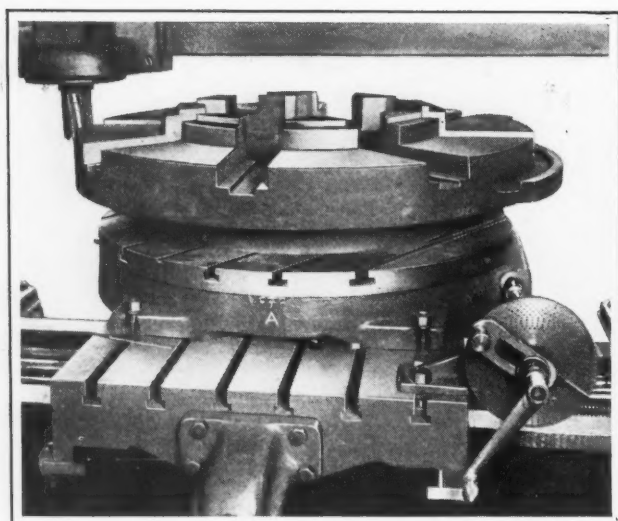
Fixture for Accurately Milling the Slots in Stationary Pipe Die-head Bodies
